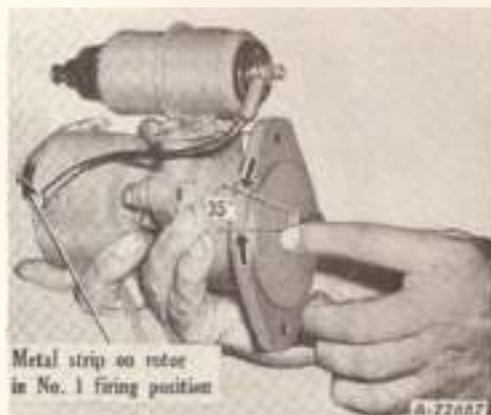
A. Engage the gears and press the drive shaft in with the palm of the hand.
